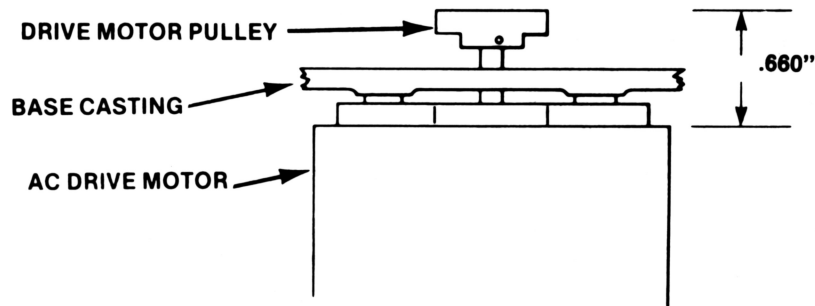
DRIVE MOTOR PULLEY ADJUSTMENT
